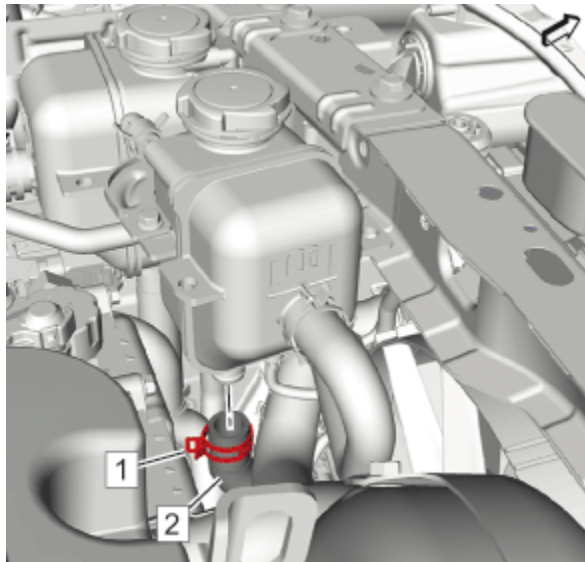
Drive Motor Battery Coolant Pump Inlet Hose
